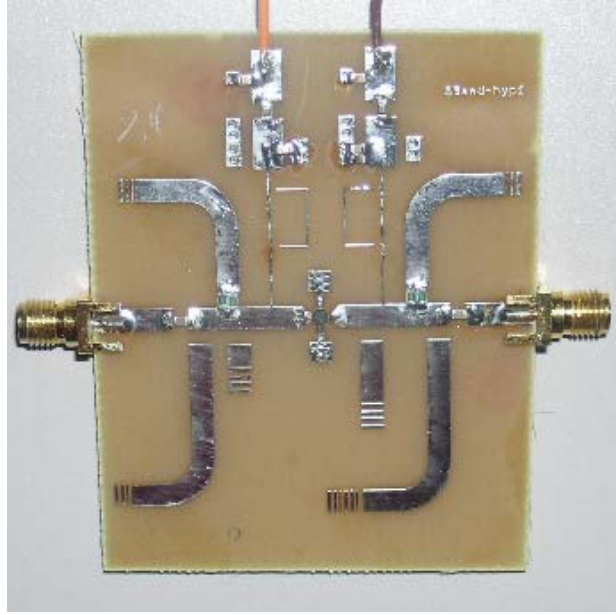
PCB of multi-service design configured at 2.4 GHz
